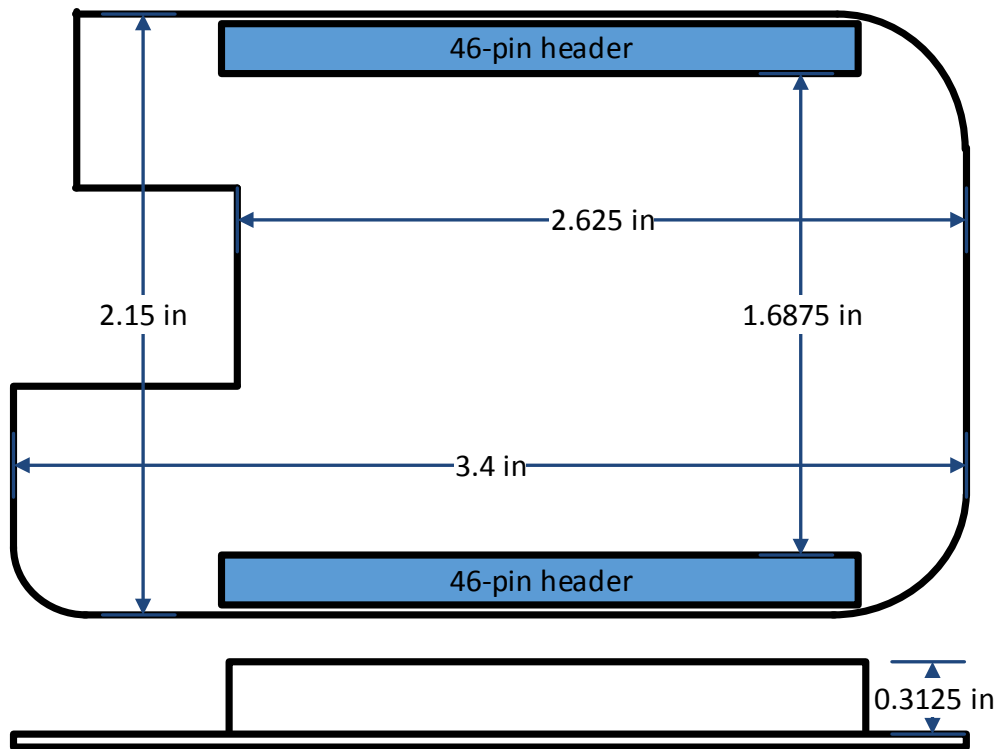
Beaglebone Black expansion board dimensions
